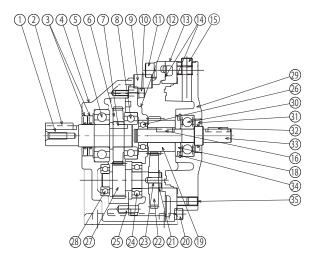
Type CHH (6000SK Series Horizontal, Reducer) (Example: Frame size 6075SK)
